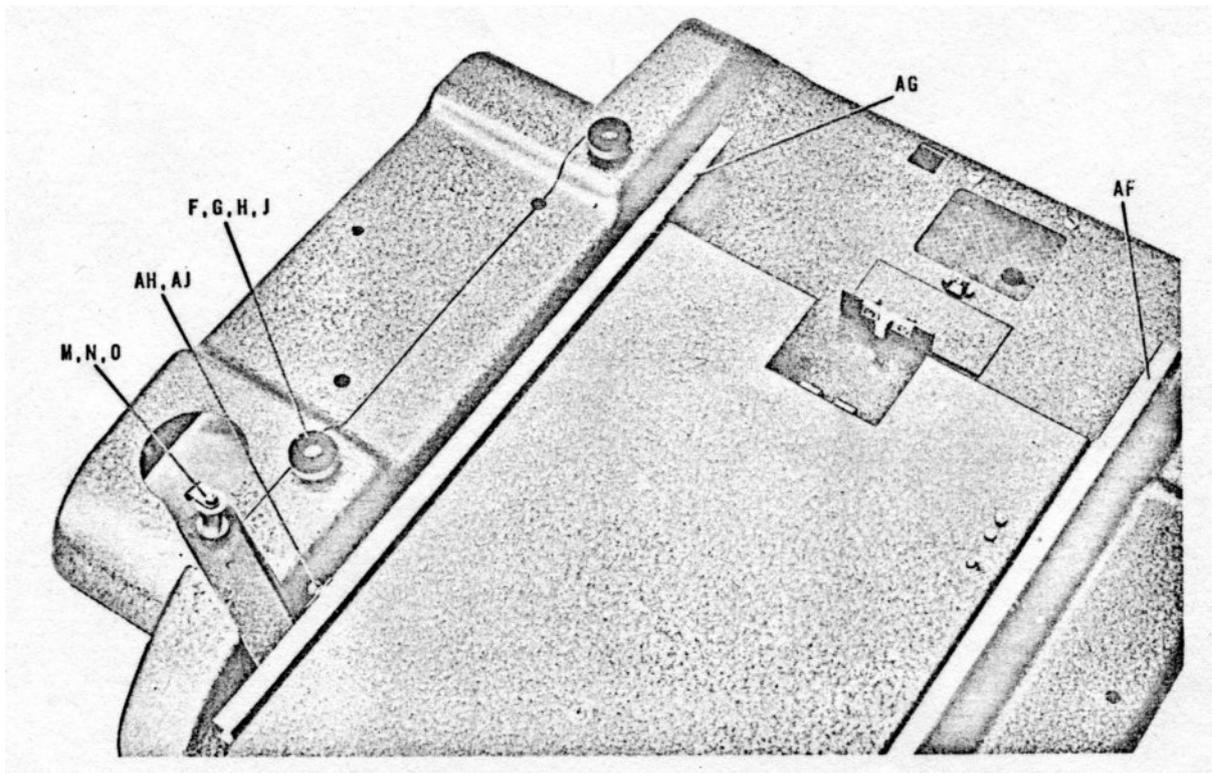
BASE ASSEMBLY (UNDERSIDE VIEW)
